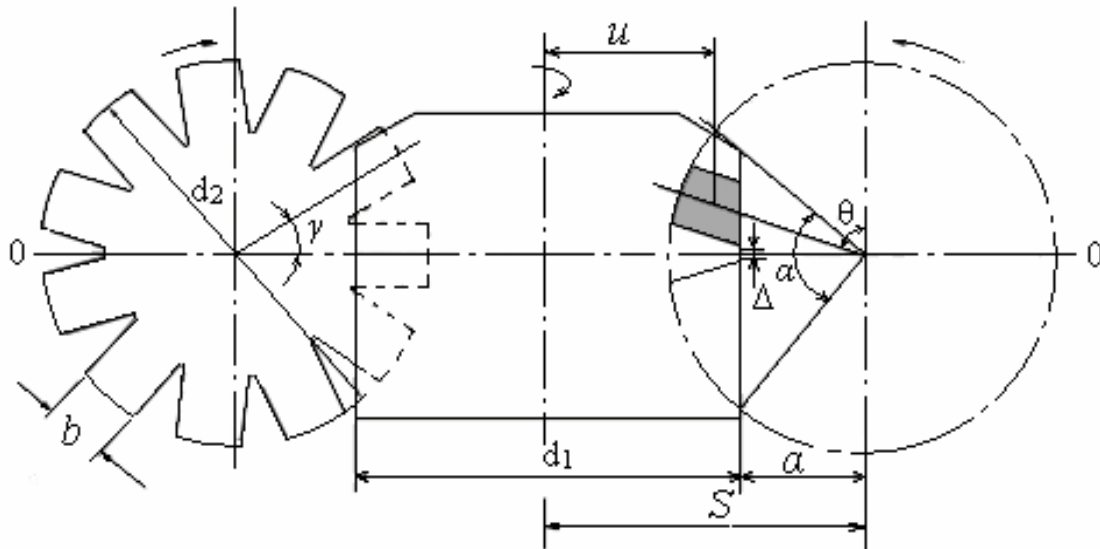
The basic geometry of the engagement pair of the single screw compressor
